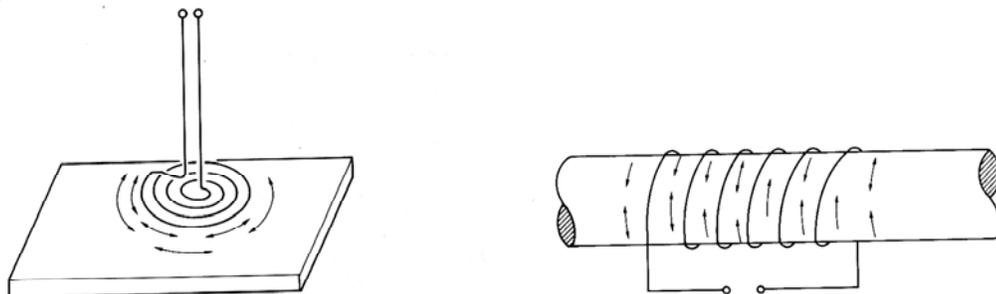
Examples of probe coil configurations: Pancake probe for flat surfaces and solenoid coil for tubular parts. Source: Ref. 6; used by permission.
